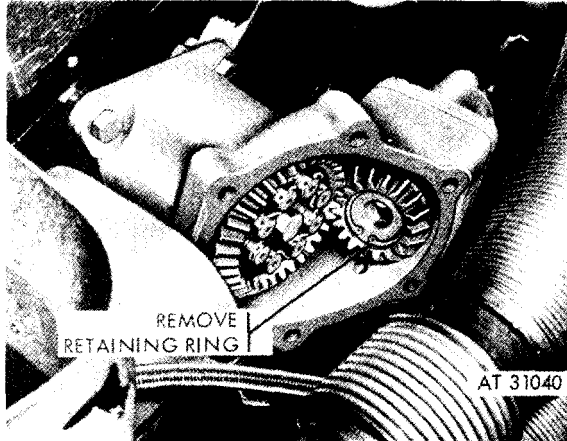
Removing or installing camshaft drive gearshaft plug retaining ring.
